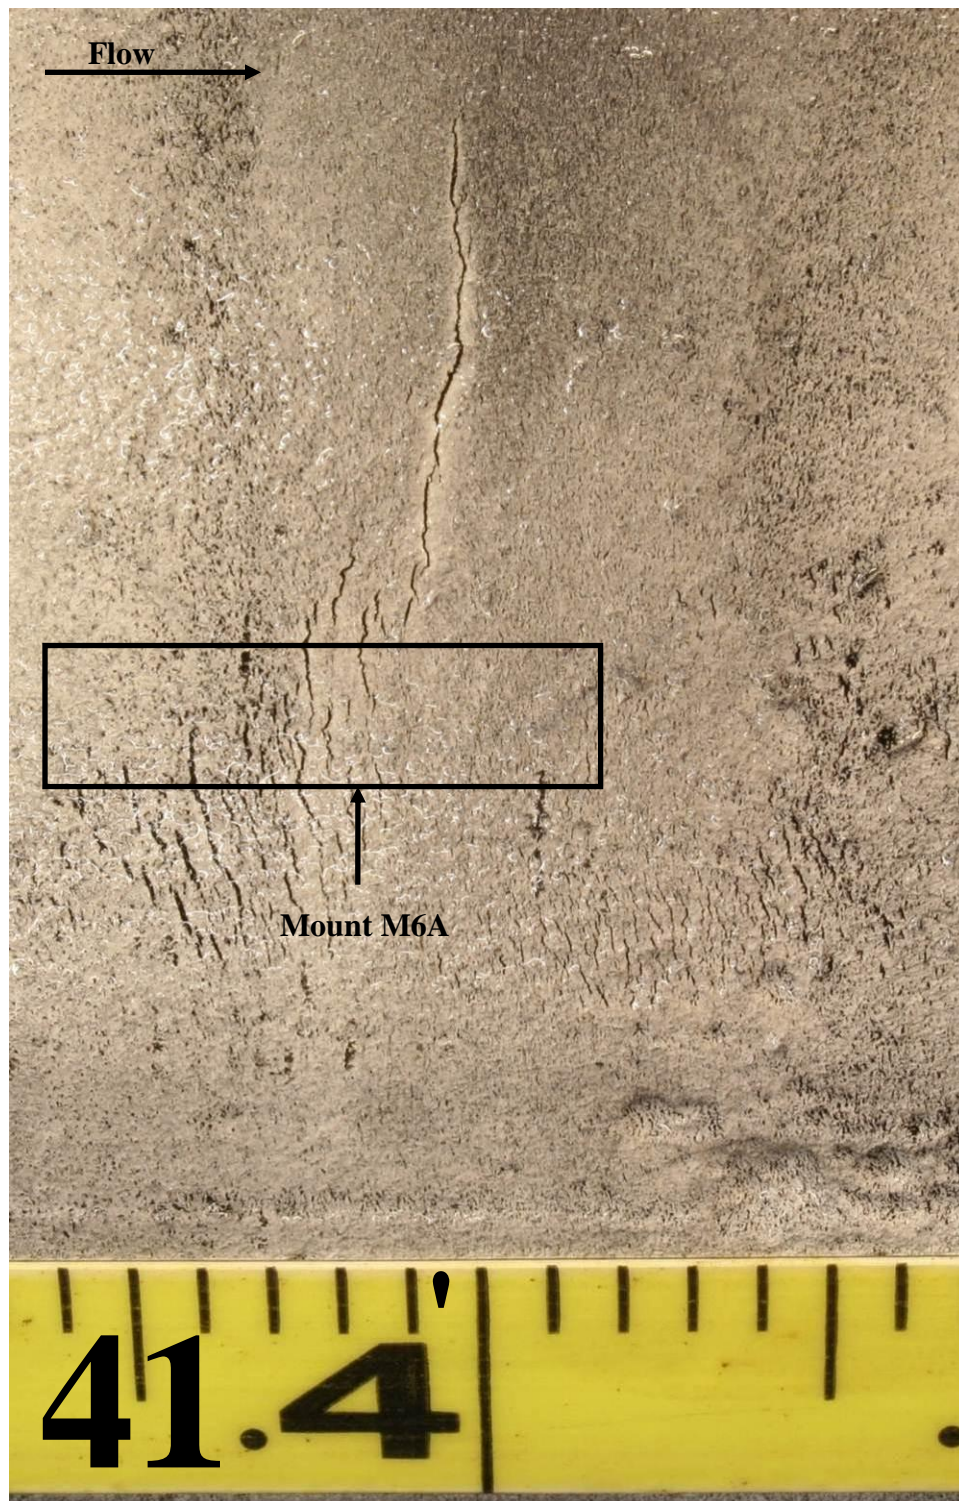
Photograph of the external pipe surface showing Crack Colony 6A following MPI. The tape measure indicates the distance from the U/S girth weld.
